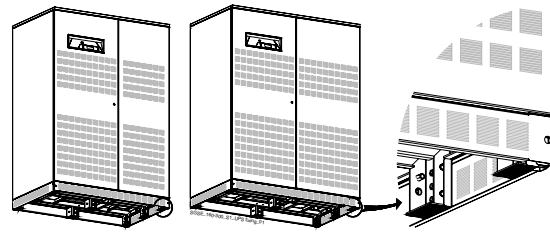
Fixing of the UPS cabinet on the floor
